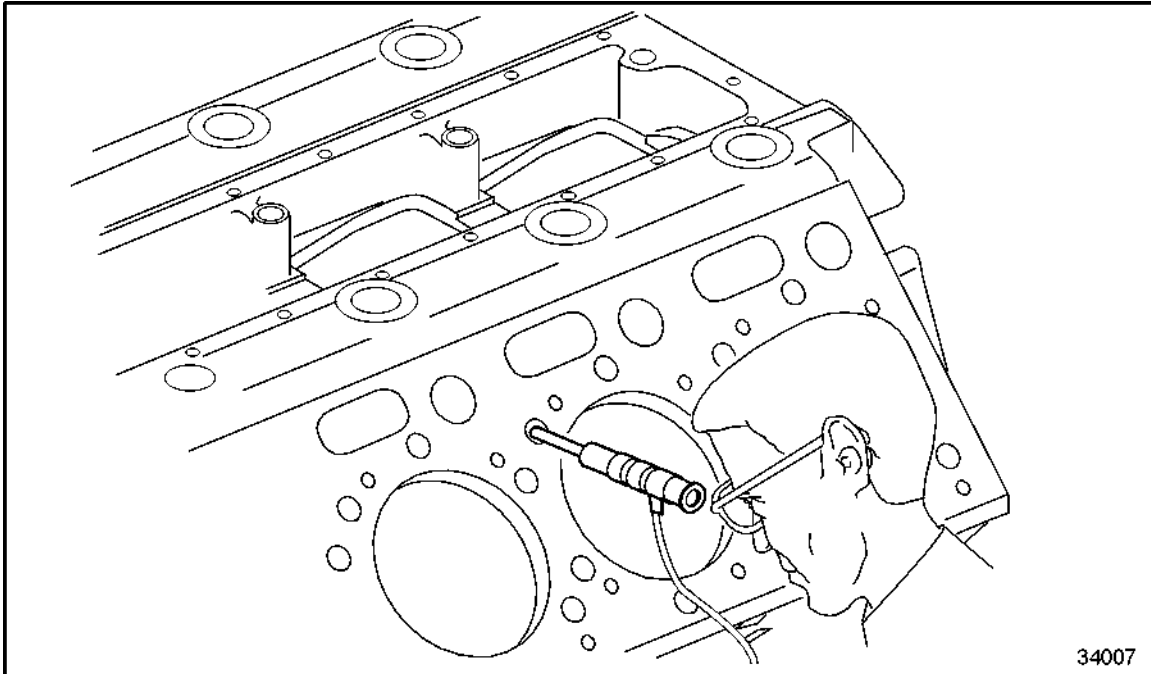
Viewing Oil Bores to Valve Operating Mechanism with Borescope
